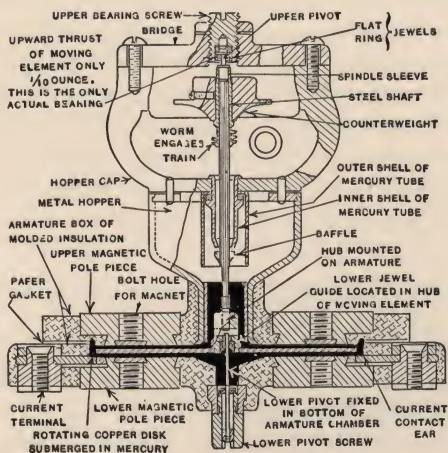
Cross-section of mercury-motor element of Sangamo Type N ampere-hour meter showing bearing system.
